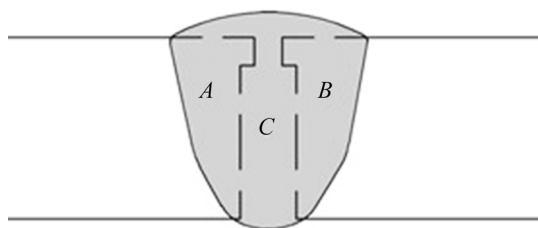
Weld profile measurements modified from Ref. [45]
